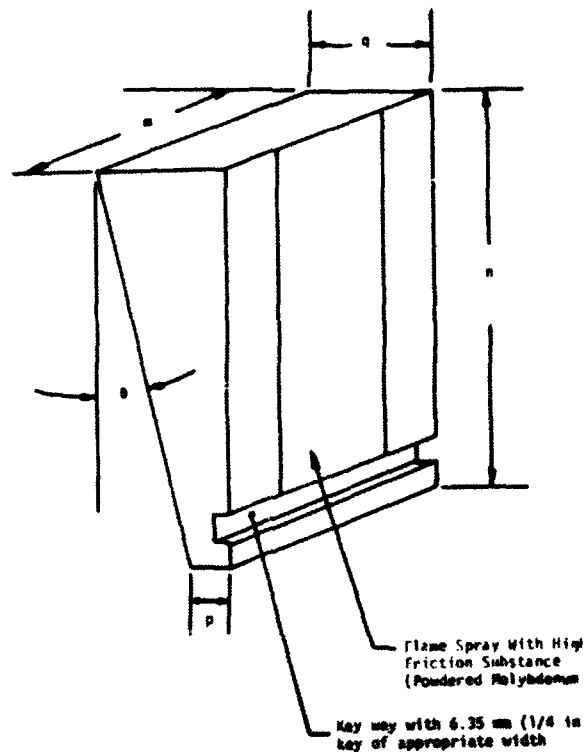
Detail of Wedge Design for Procedure B (IITRI) Test Fixture (Figure 3b of ASTM Standard D 3410-87 [1])
